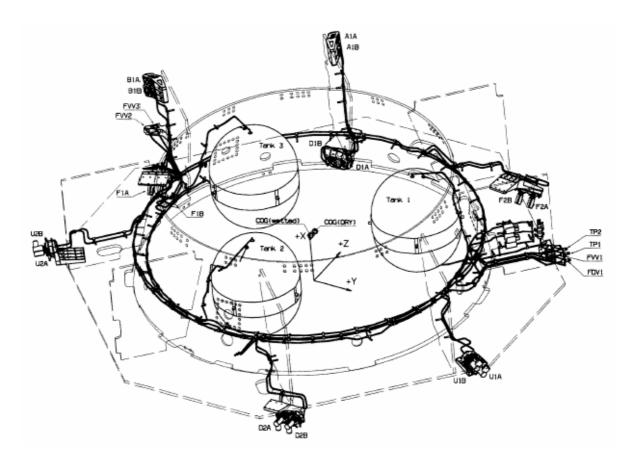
PLANCK RCS LAY-OUT
